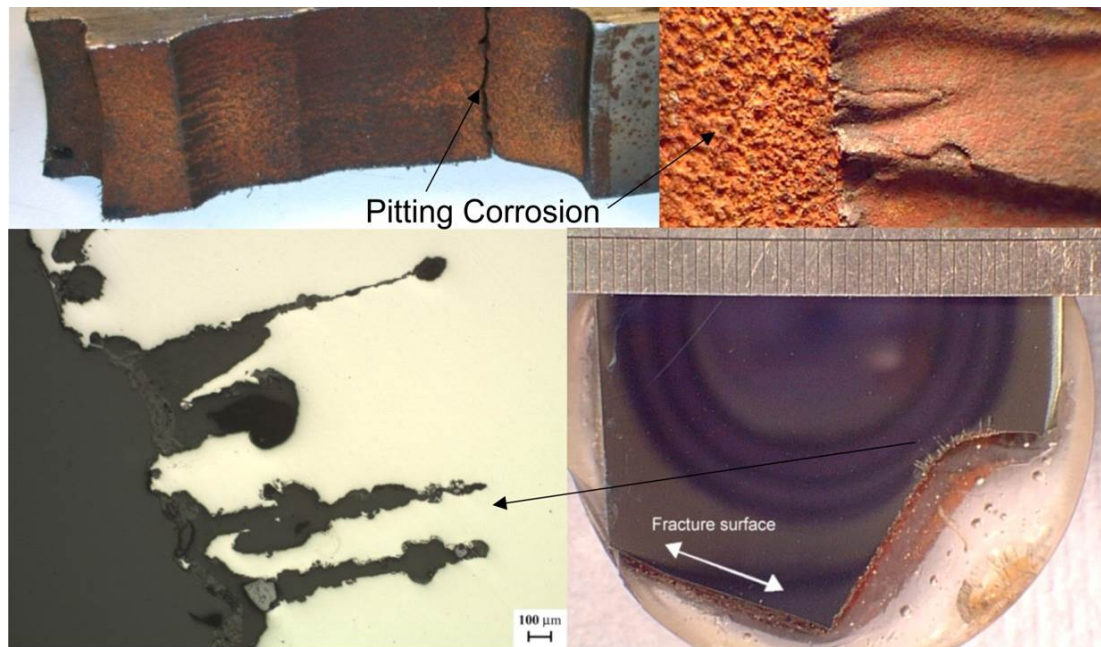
Corrosion pitting and failure in hydraulic fracturing pump - Analysis of section of 4330 hydraulic fracturing pump showing cracked bore surface, erosion and corrosion pitting.
